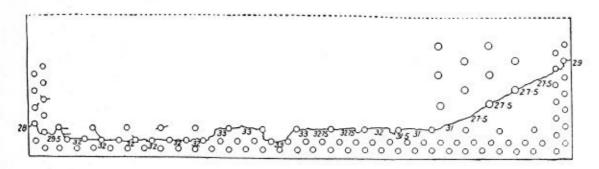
Joint of Exploded Boiler, Showing Line of Failure
